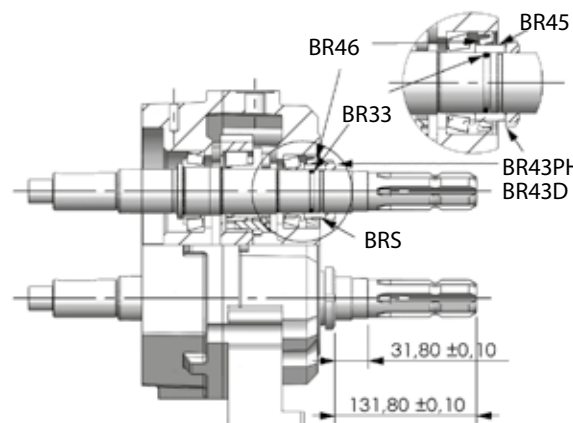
Assembly of gearcase and measurements for bearings preloading (Version D).
